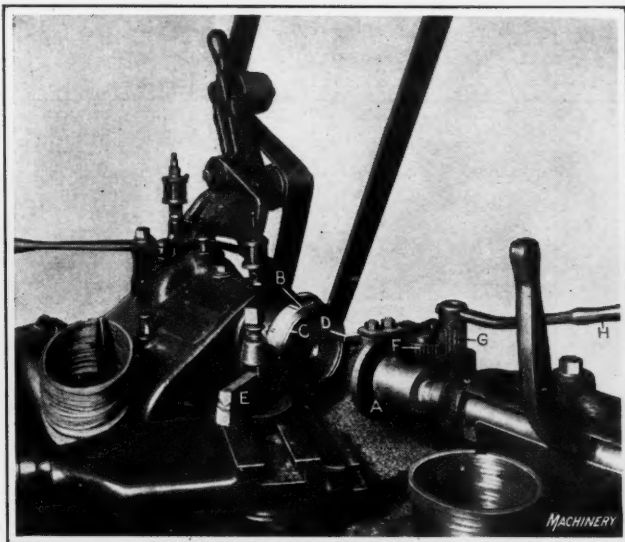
Short-bed Lathe equipped with Special Centers and Facing Attachment for turning Beveled Surface on Outside Piston-rings
